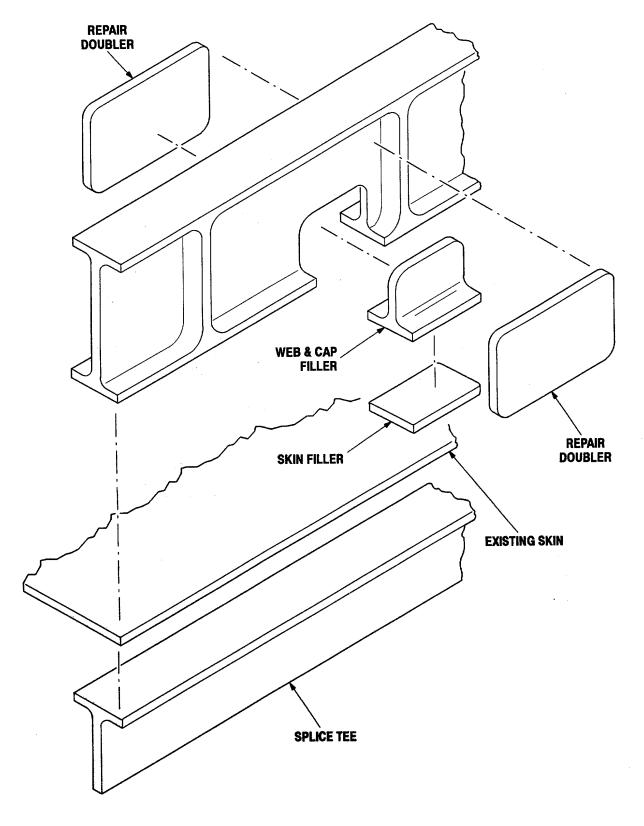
Repair Concept 6: Damage to Forged Frame
